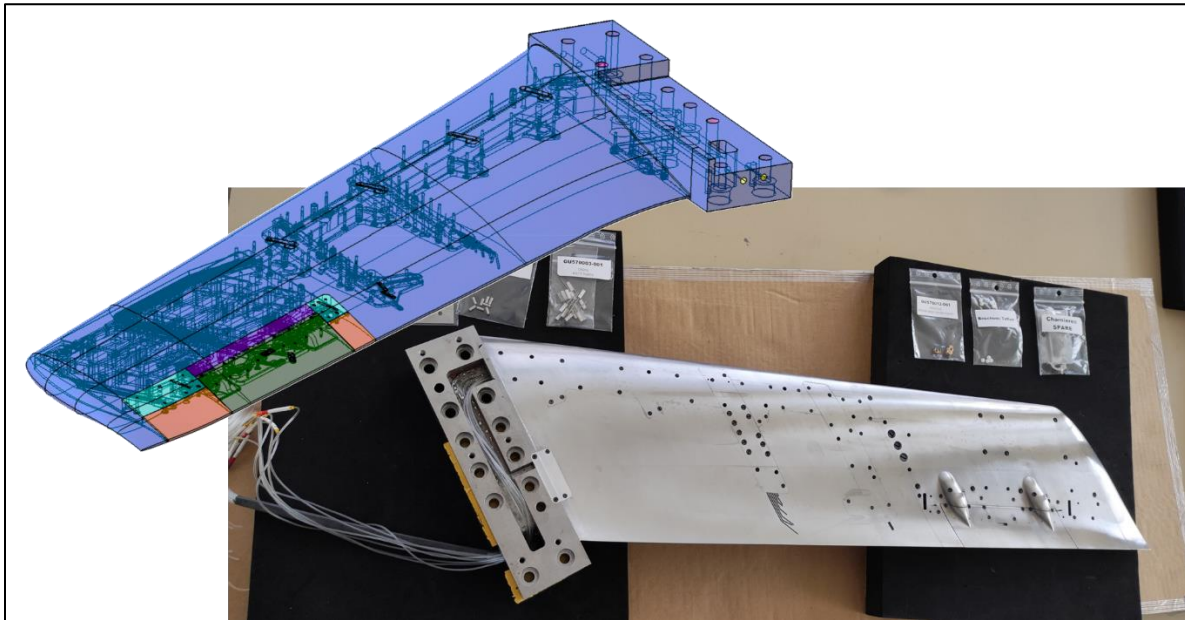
Wing assembly, CAD view (left) and Manufactured model (right)
